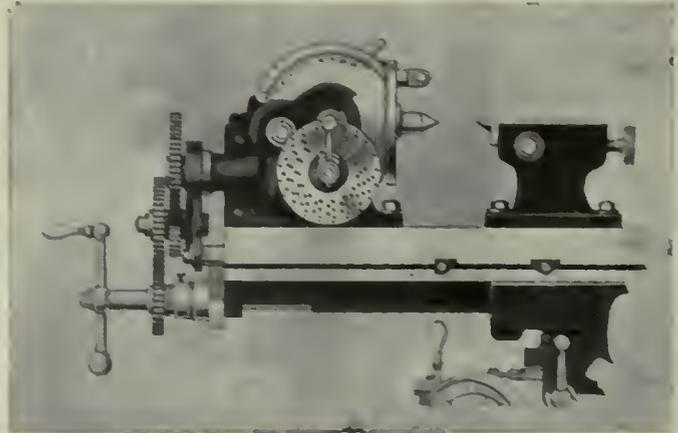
GENERAL APPEARANCE OF UNIVERSAL DIVIDING HEAD.
